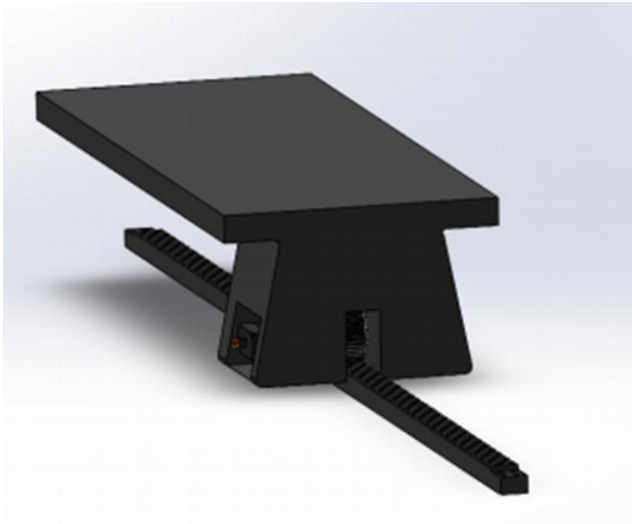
Interfacing of slider, rack and pinion, gear shaft, and motor
